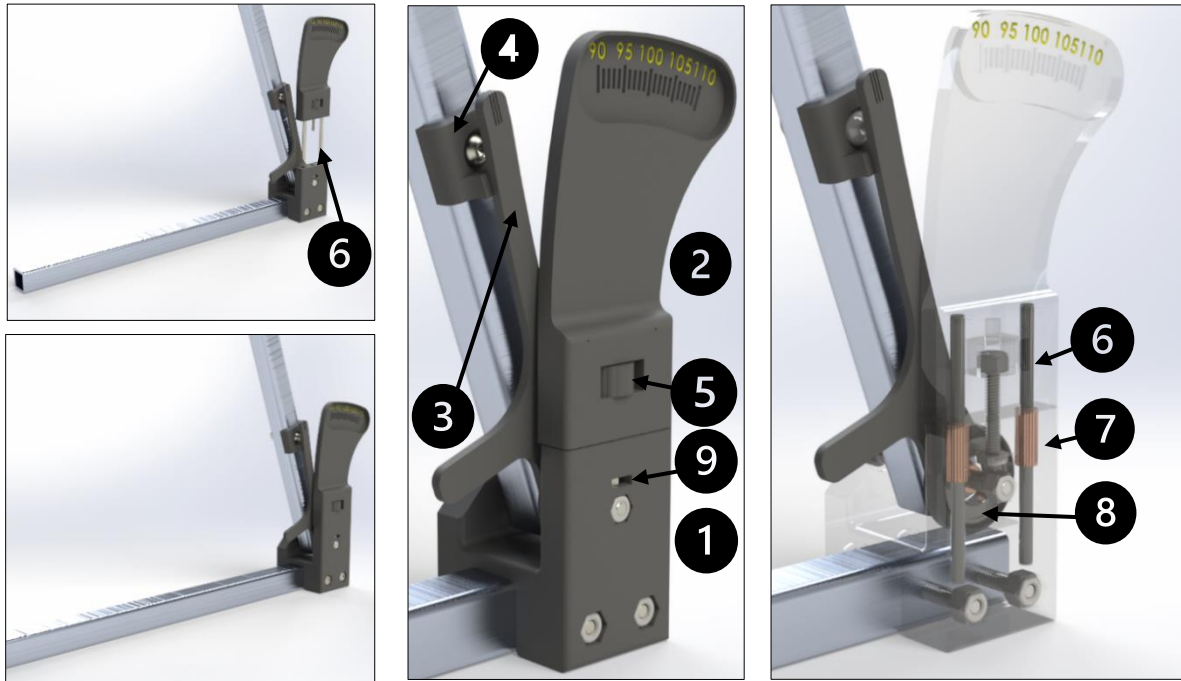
Force gauge subassembly used for applied force measurement. The unit cost measurements include all material, fabrication, and assembly related costs.
